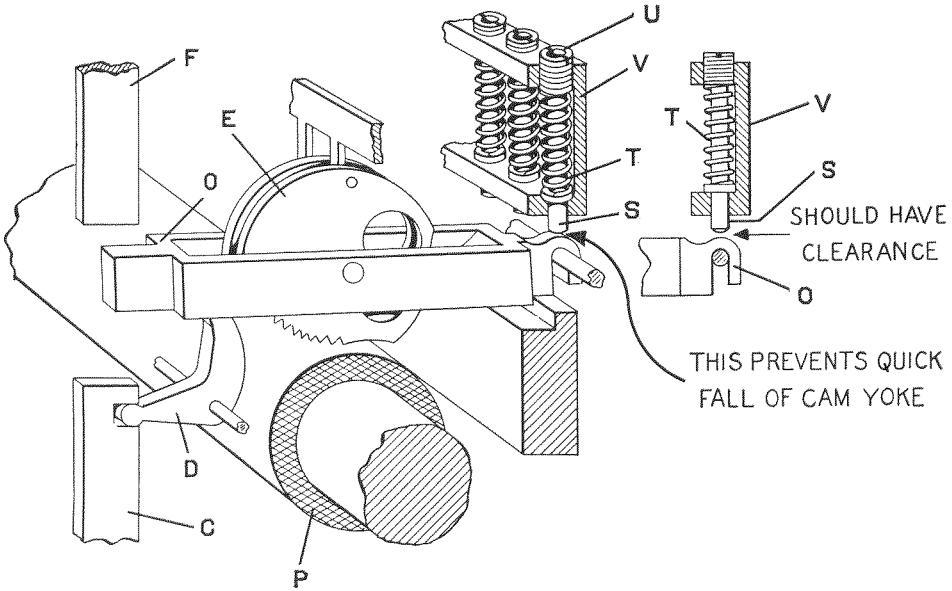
Arrangement used on the later keyboards, and is a further detail of keyboard parts. *C*, keyboard bar; *D*, trigger; *E*, keyboard cam; *O*, keyboard cam yoke; *P*, cam roll; *S*, plunger operated by the spring *T*; *U*, screw bushing for adjusting the tension of the spring *T*; *V*, frame in which the plungers and springs are mounted.
